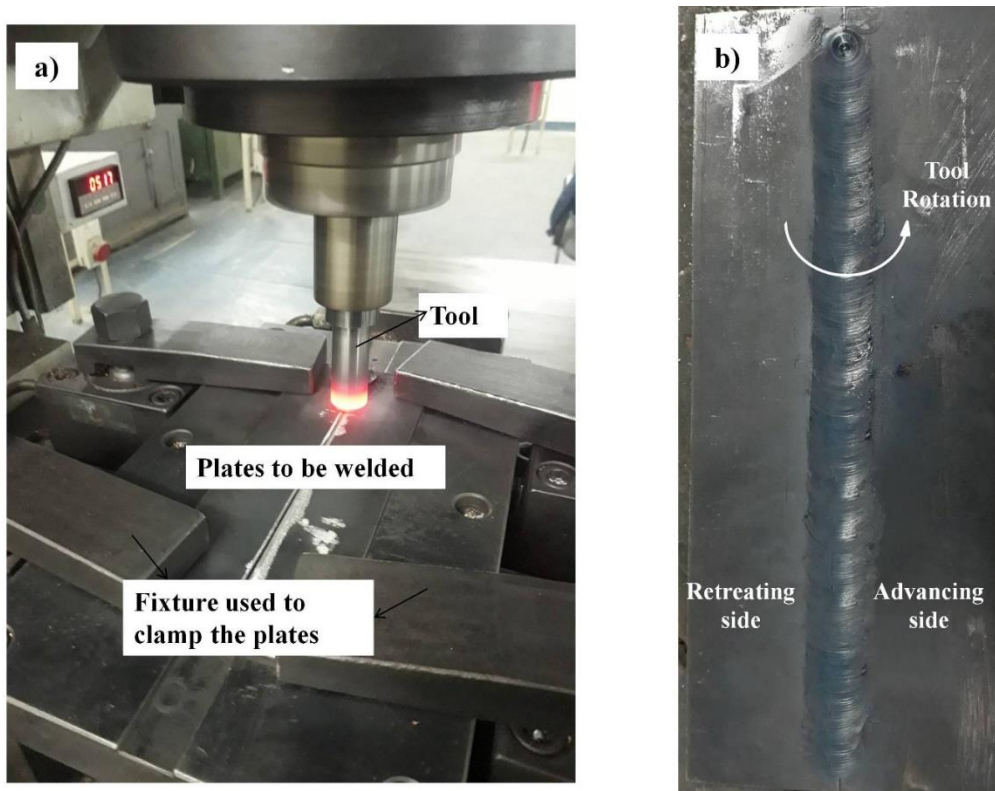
a) Friction stir welding setup b) Friction stir welded steel plate
